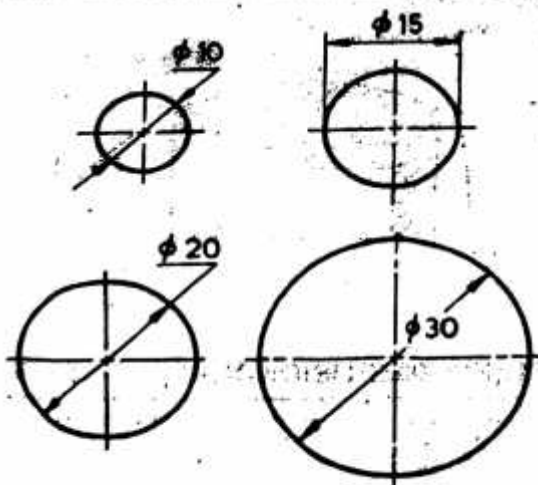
DIMENSIONING OF A CIRCLE
